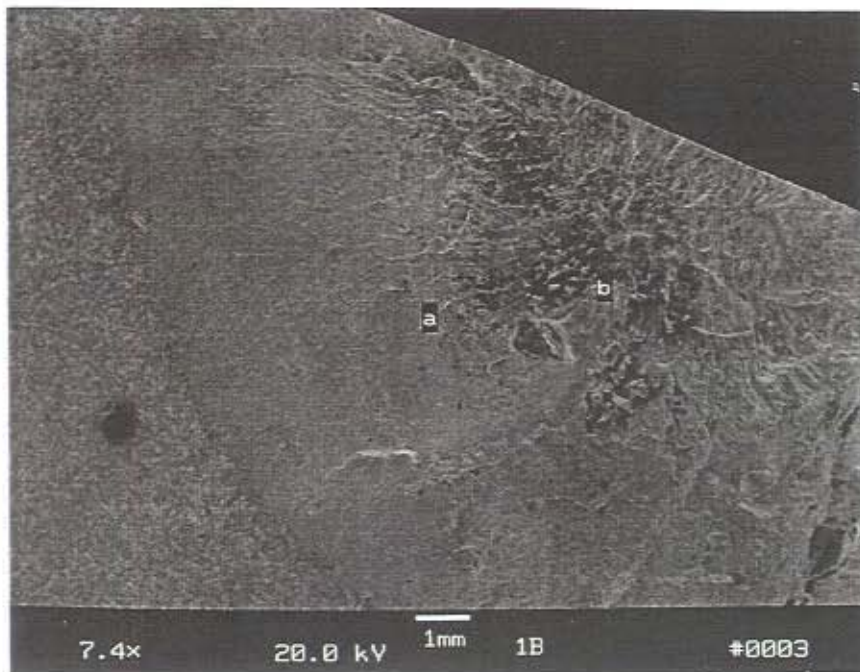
SEM Micrograph of the Crack Surface of Defect 1B Showing the Initial Weld Defect and Fatigue Extension. [Mag. 7.4X]
